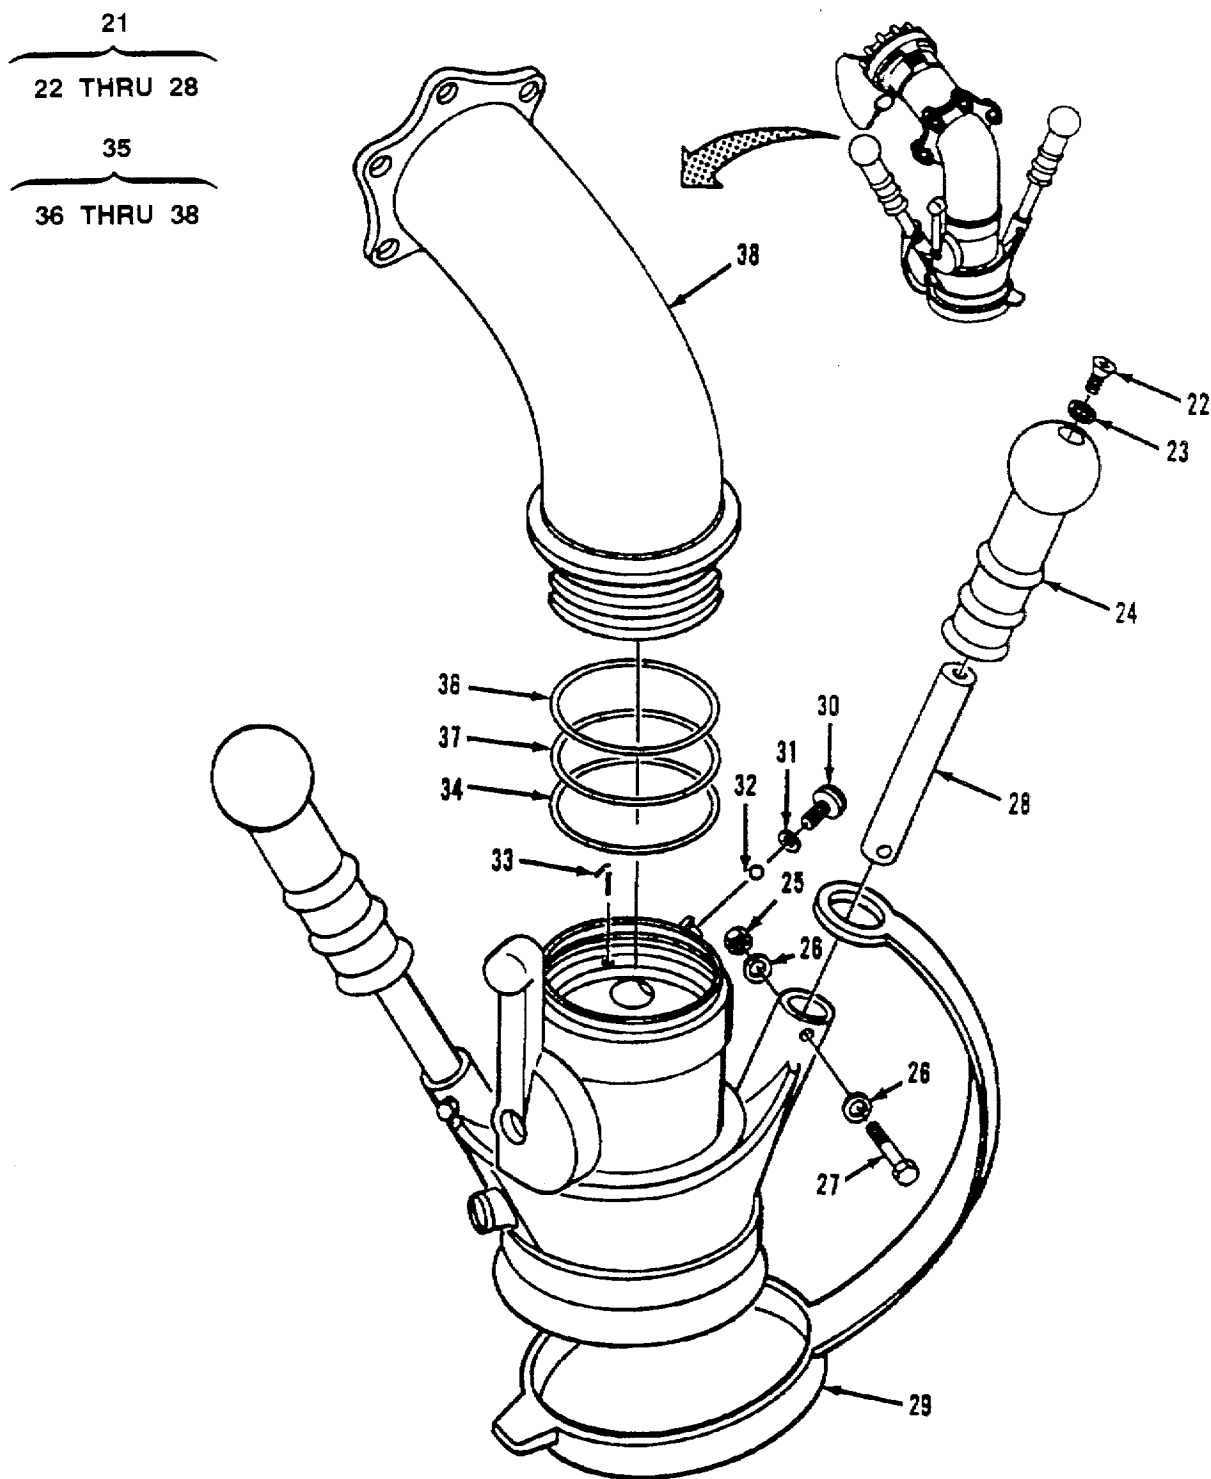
Pressure Fueling Nozzle Assembly (HTARS100) (Sheet 3 of 4)
